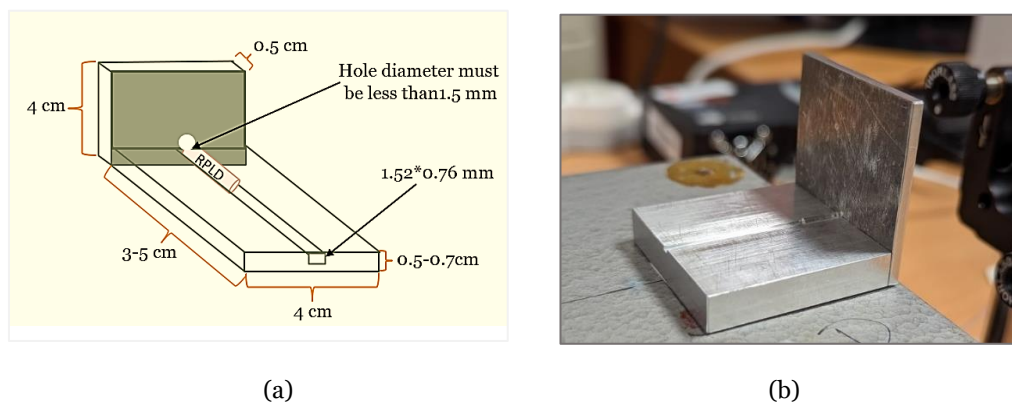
3: (a) Design of sample holder embedded with a filter having a hole of ~ 1.5 mm diameter, (b) fabricated sample holder
